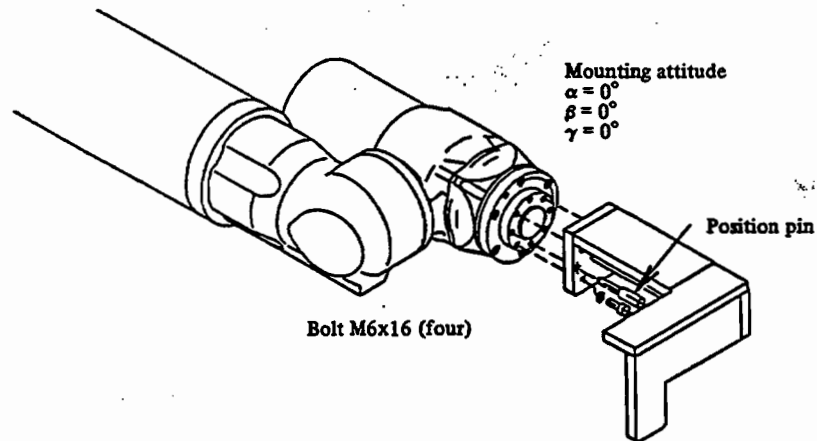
(d) Mounting fixture on wrist (S-10)
